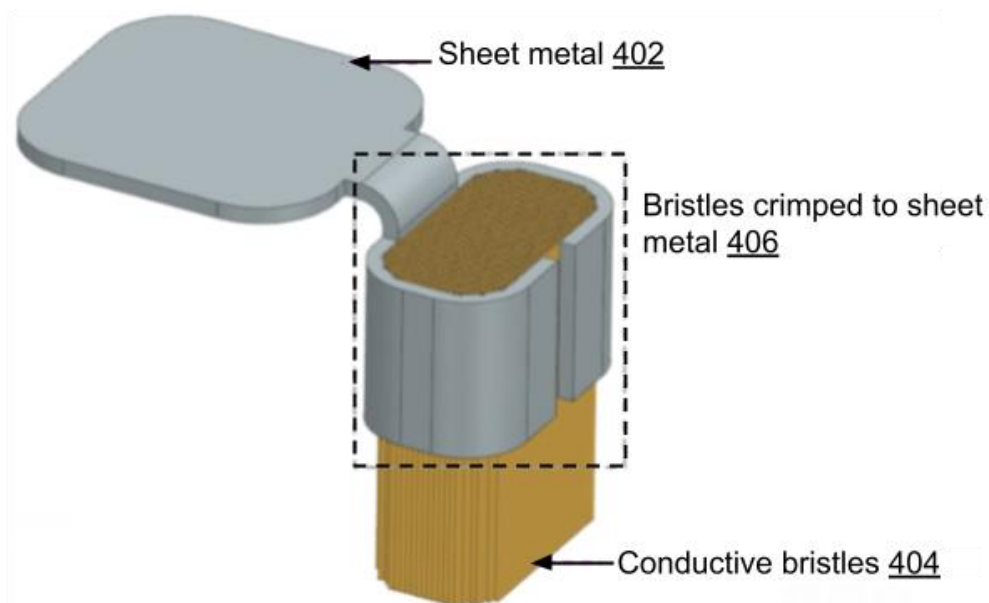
Close-up view of conductive bristles and their mount to the PCB
